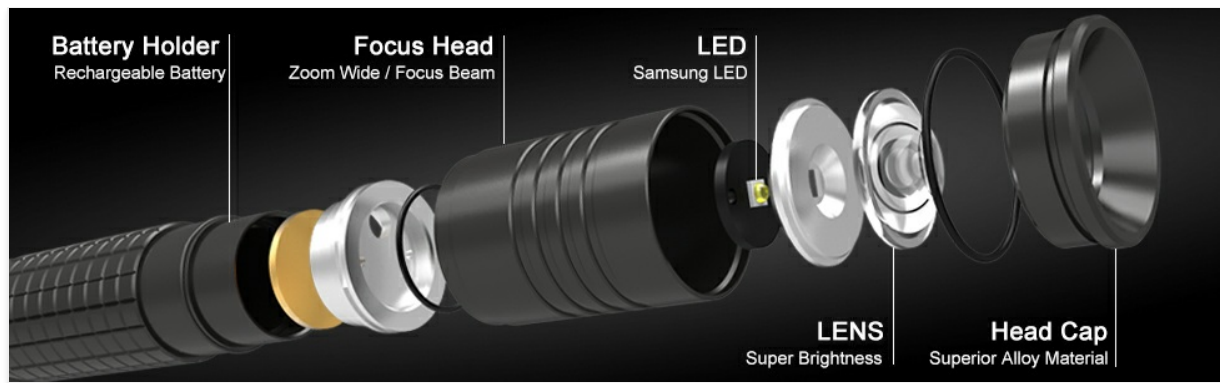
Exploded view of NICRON N8F Flashlight components.
